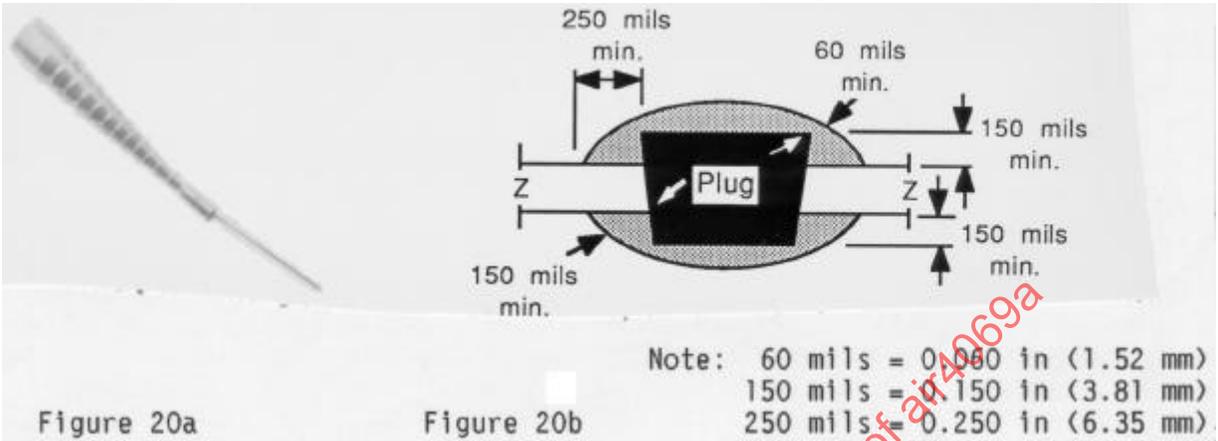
Sealing a Large Hole or Slot with a Plug and Sealant
